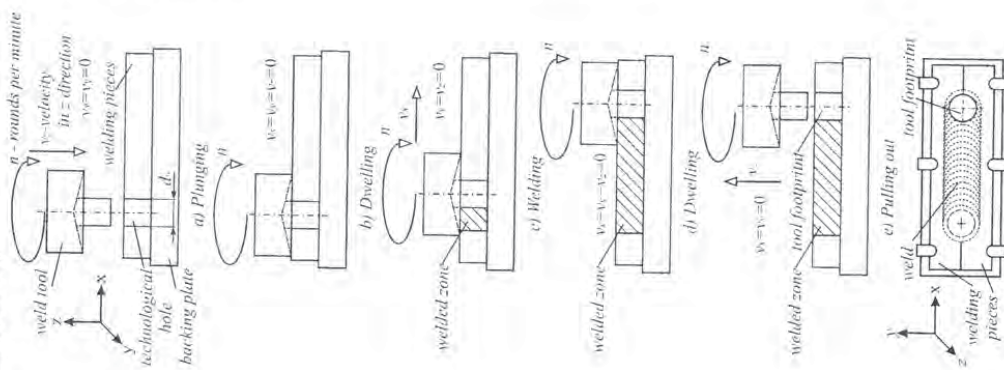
Phases of the friction stir welding process. Welding is processed until the welding pieces become connected along the planned weld distance. After welding phase traversal movement between
